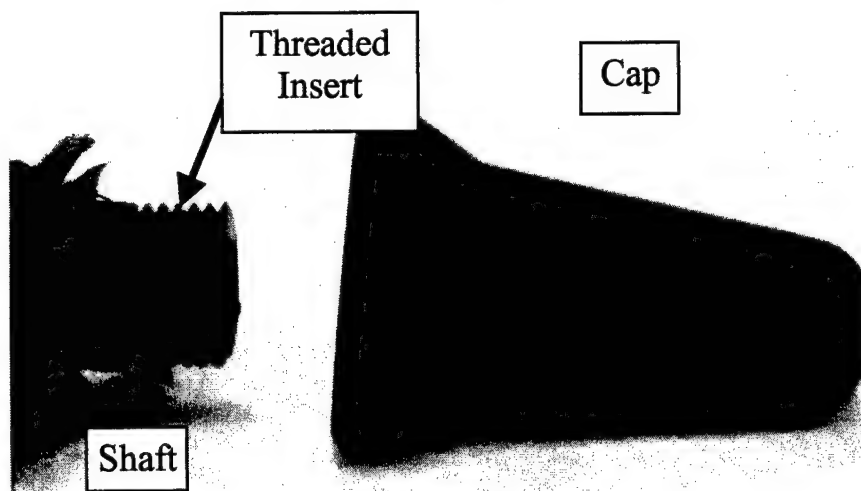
Umbrella Shaft, Threaded Insert, and Cap
